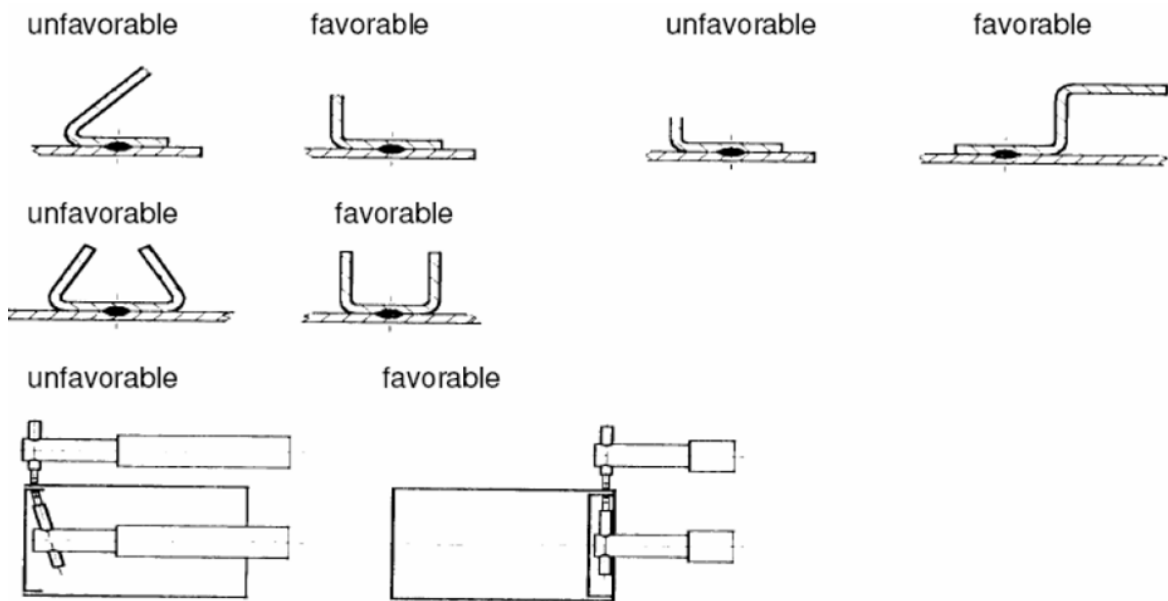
Examples of unfavorable and favorable accessibility for the welding electrodes at the weld flanges
